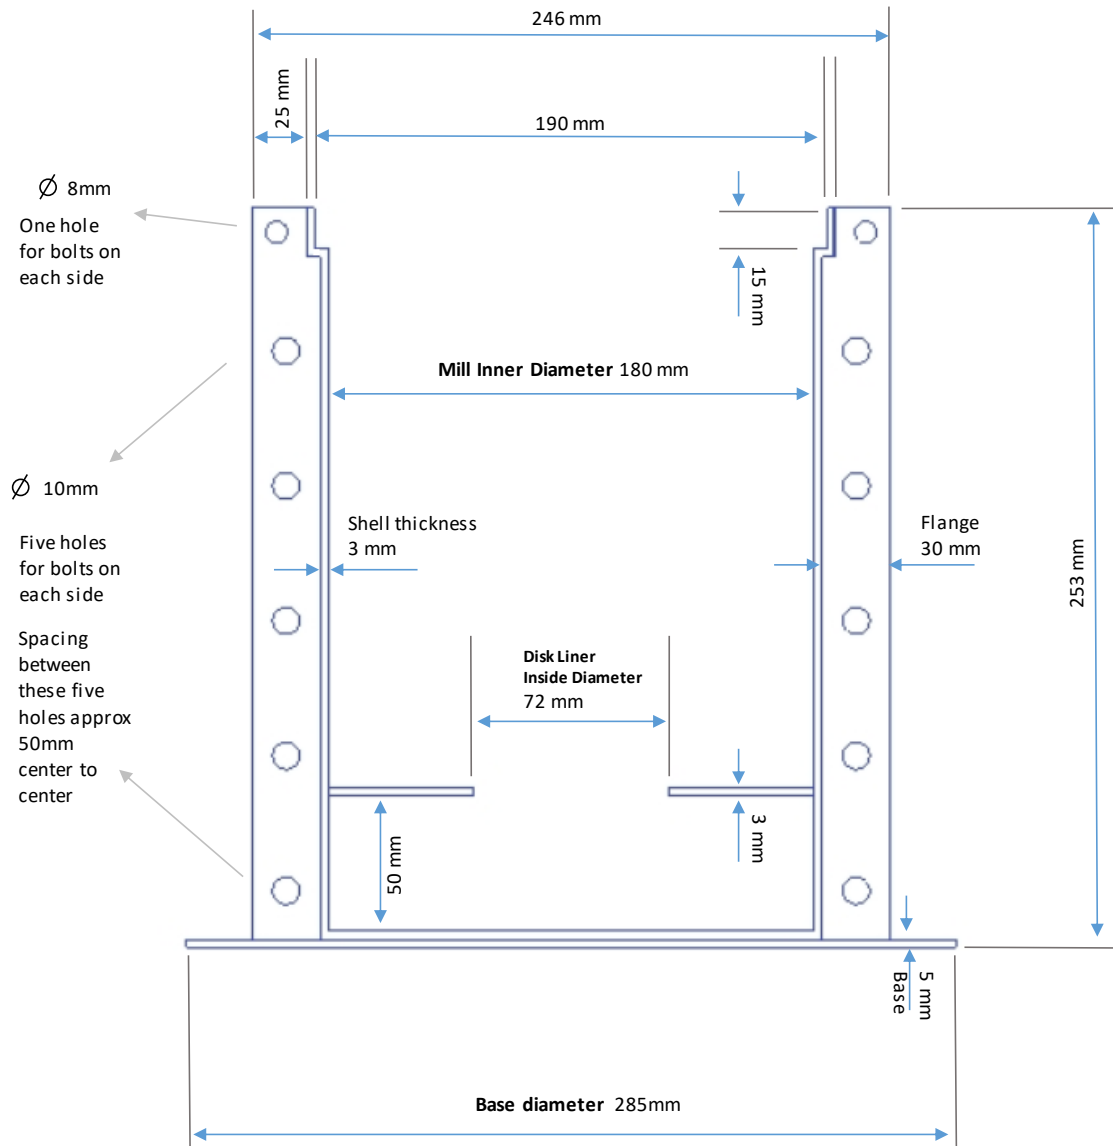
Cross section drawing of disc mill vessel showing dimensions
